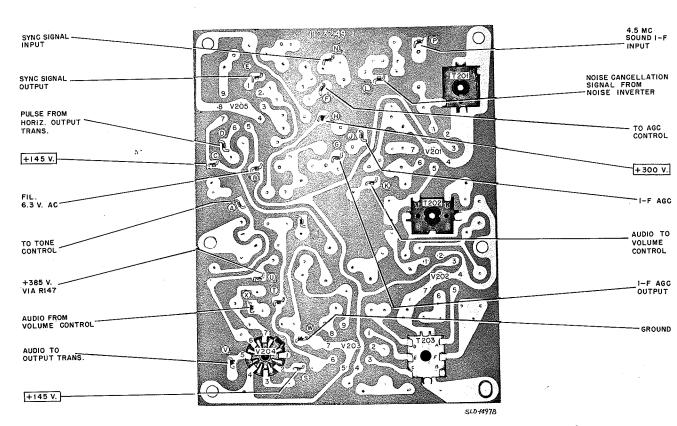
Bottom View, Printed Circuit Board, PW-200, CTC5N—Sound I-F, Audio, AGC, 1st Sync.
